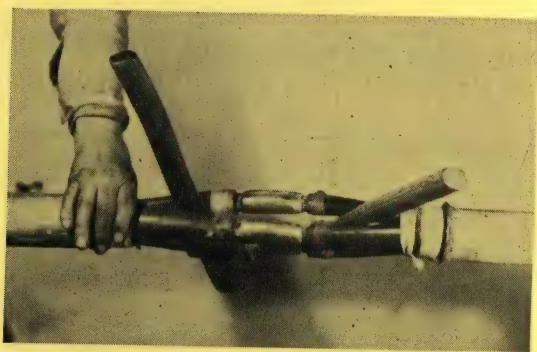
Connectors are soldered solidly into place and all burrs smoothed off.
